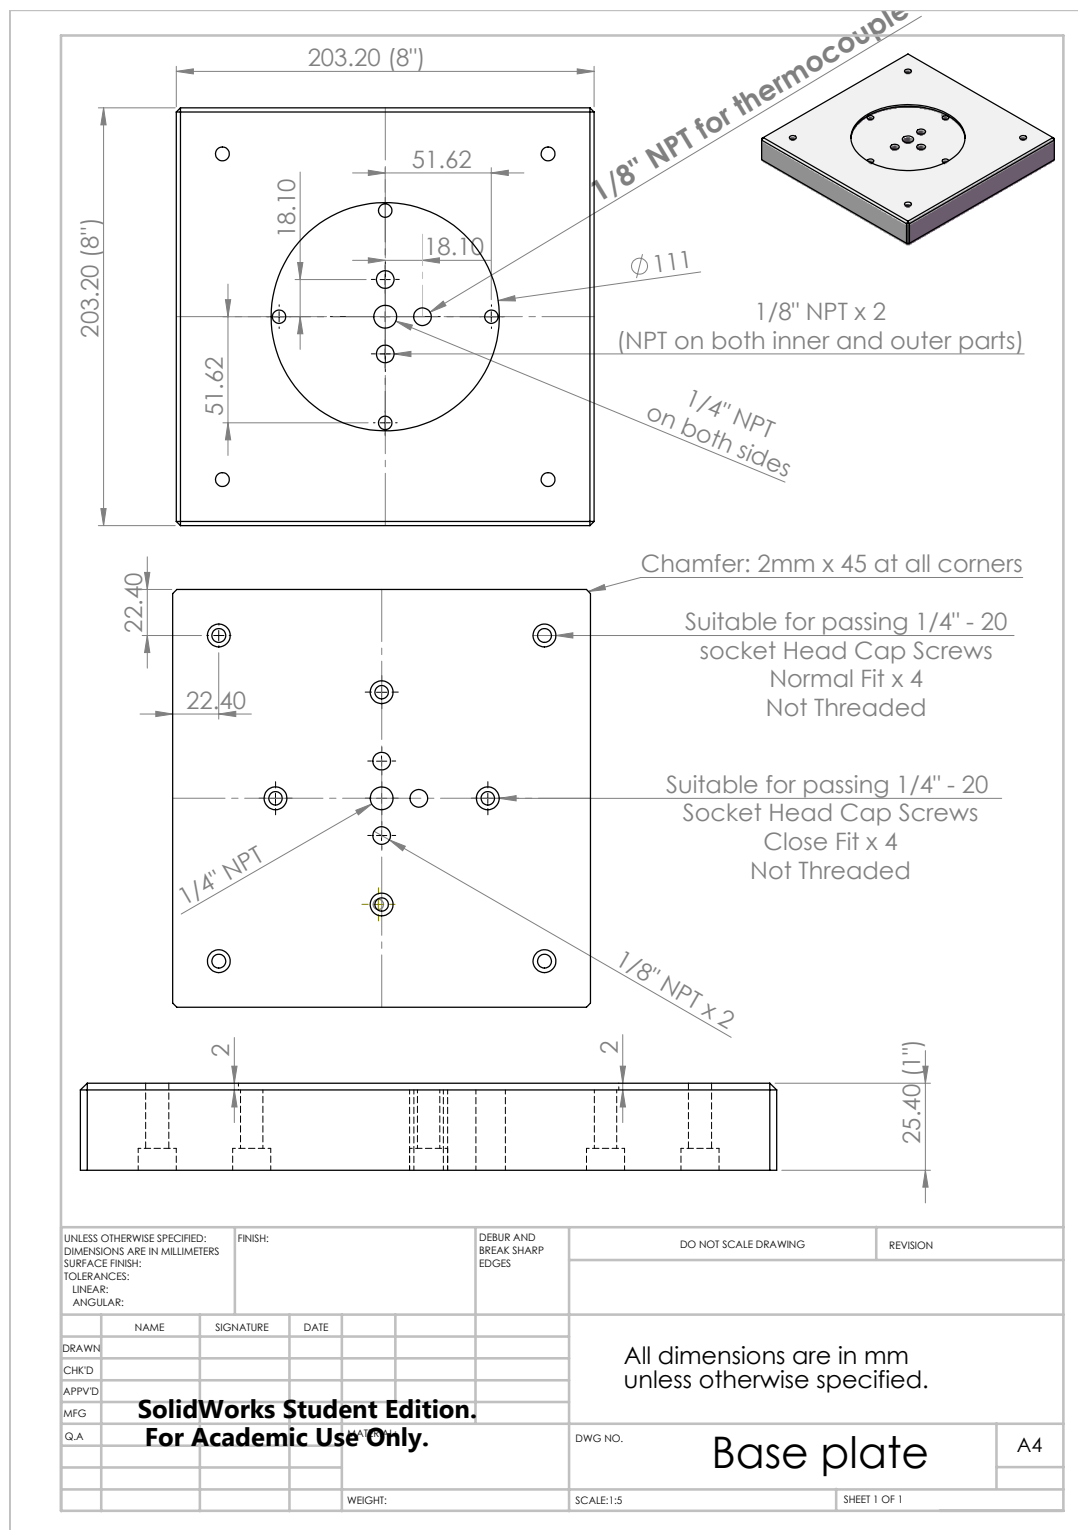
Design drawing of the stainless steel jacket holding the ceramic burner.
